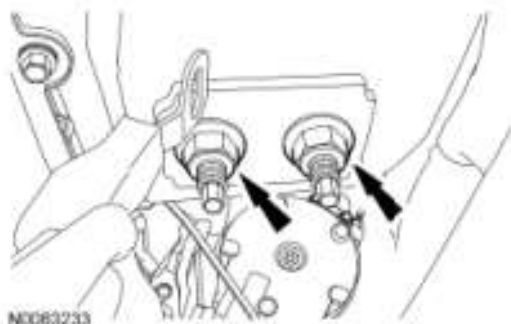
Locating Exhaust Manifold Flange Nuts
